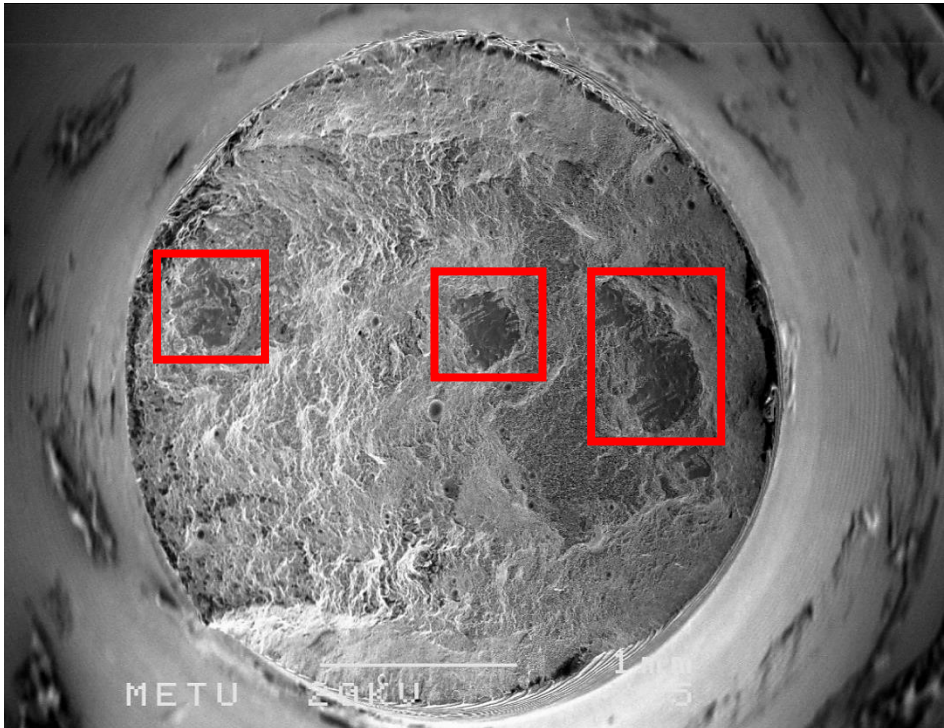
General view of 30T tension test specimen fracture surface with insufficient melt regions which consisted of about 15% of total surface.
